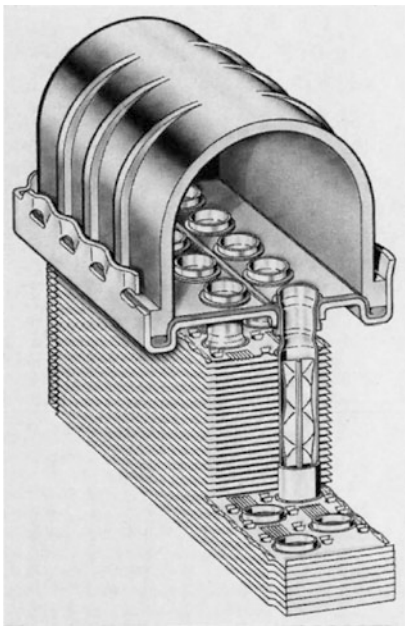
Design of an aluminum mechanically joined radiator for use in motor vehicles (source: Behr)
